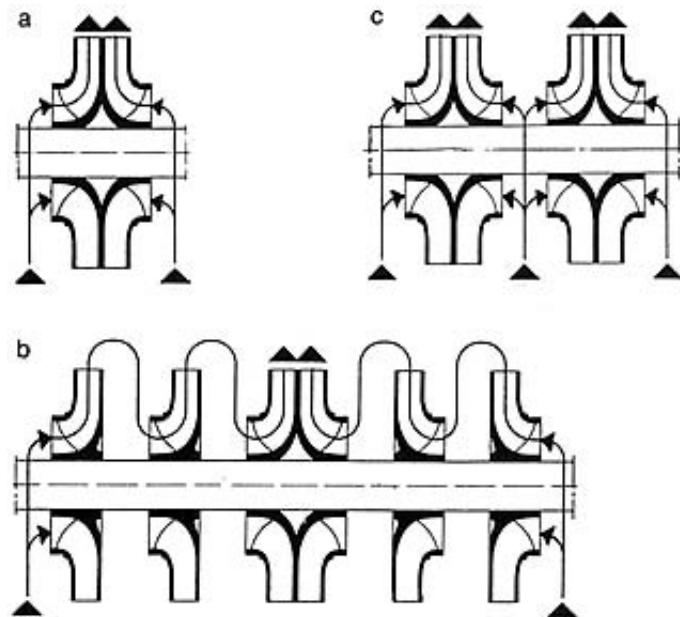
Multisuction impeller arrangements, with back-to-back impellers
